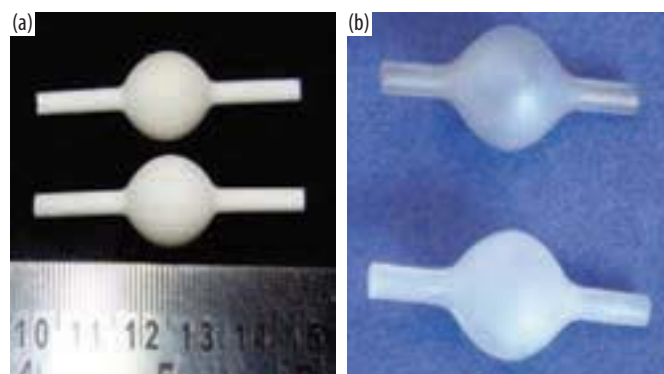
(a) Sintered PCA tube (b) hot isostatically pressed PCA tube
